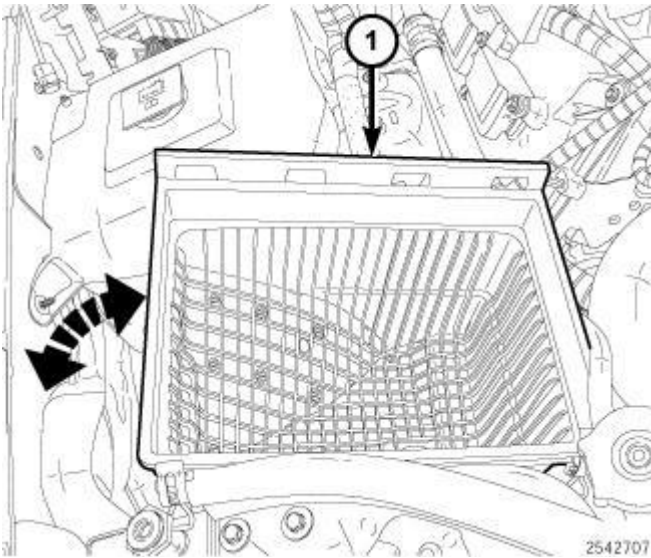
Lifting Housing Assembly While Rotating Up Toward Engine
